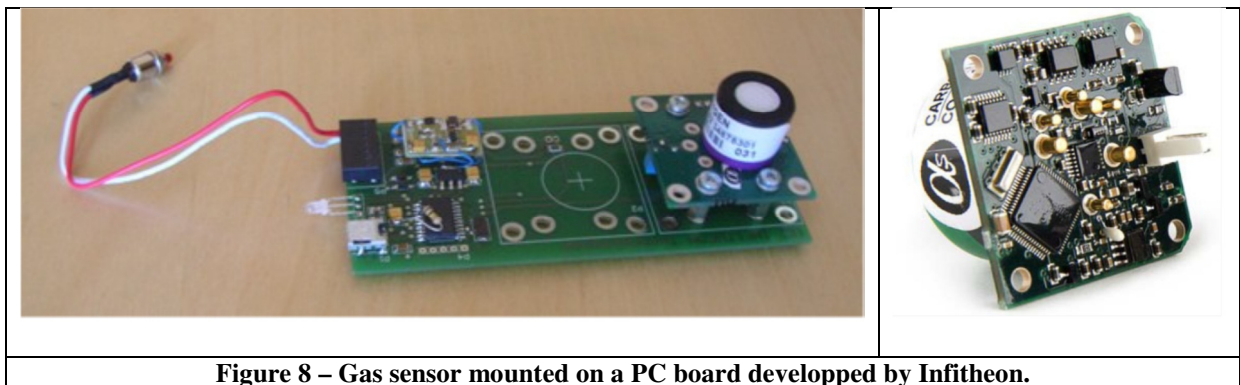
Gas sensor mounted on a PC board developed by Infitheon.
